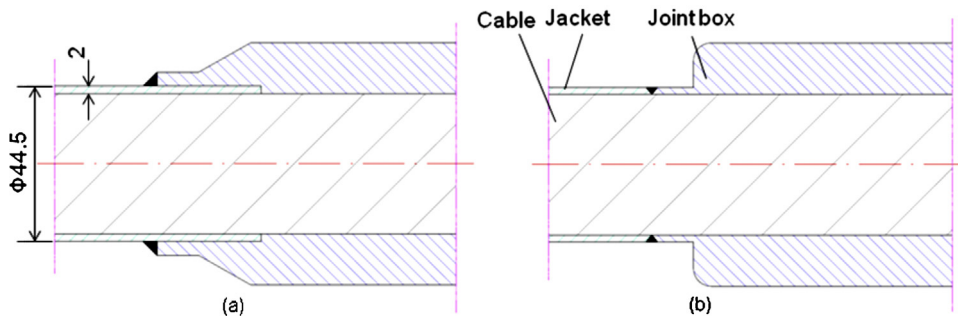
The welding structure sketch of joint box to cable jacket, where (a) is the filet weld, (b) is the butt joint.
